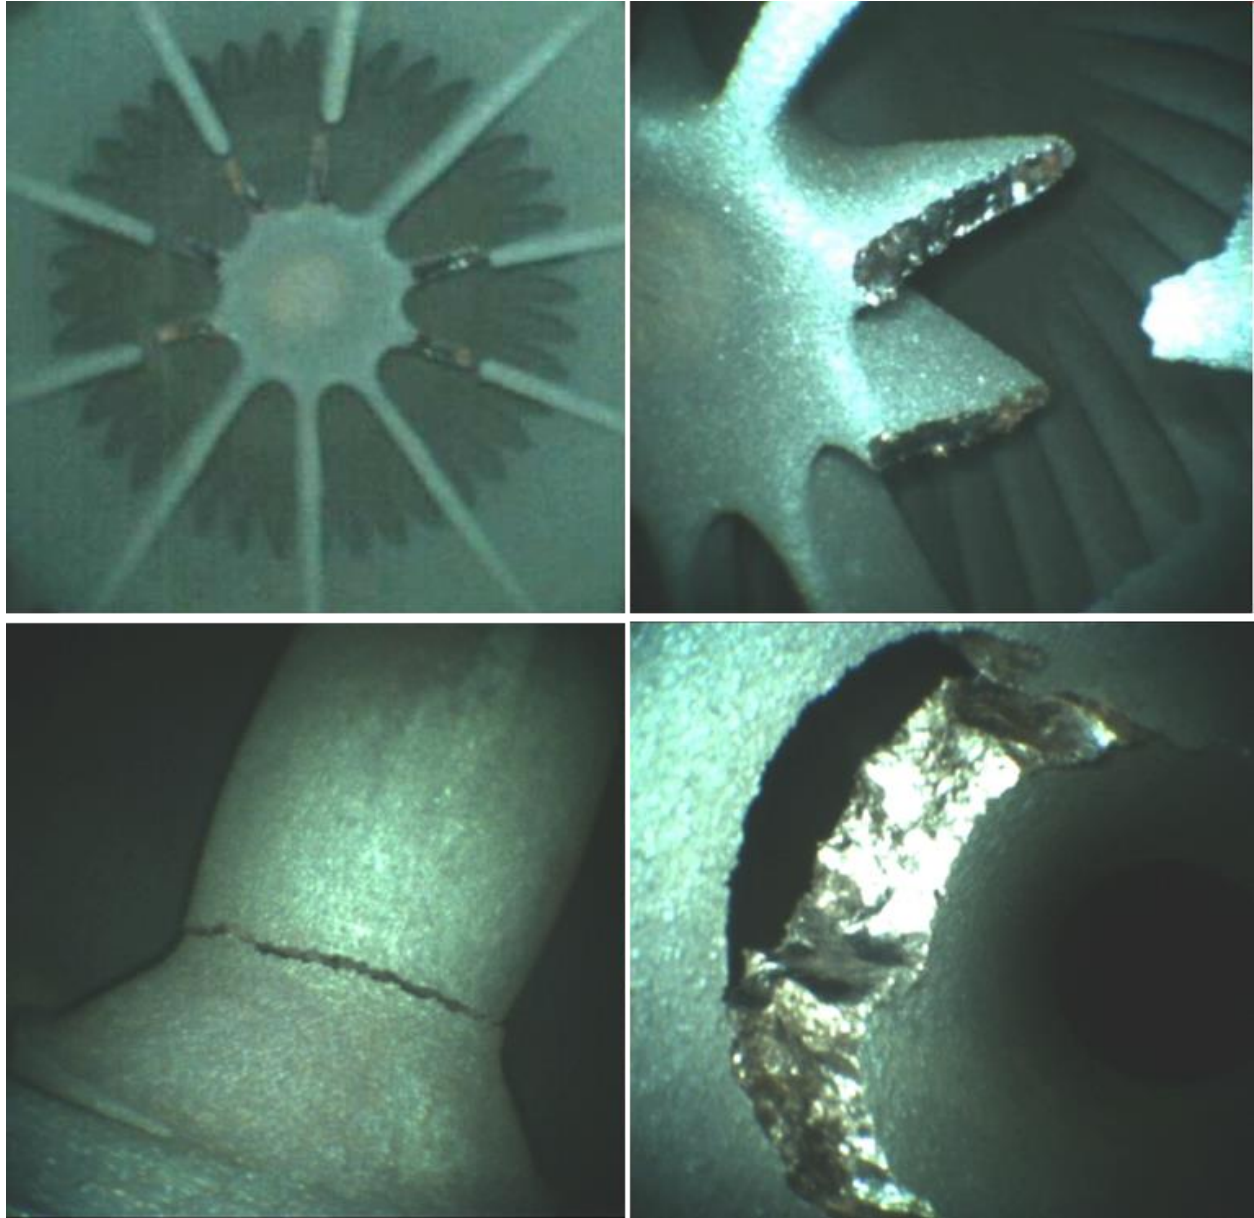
Inner body internal damage. Nose cone support struts fractures (top), exit duct cracking (bottom left), and hole in exit duct (bottom right).
